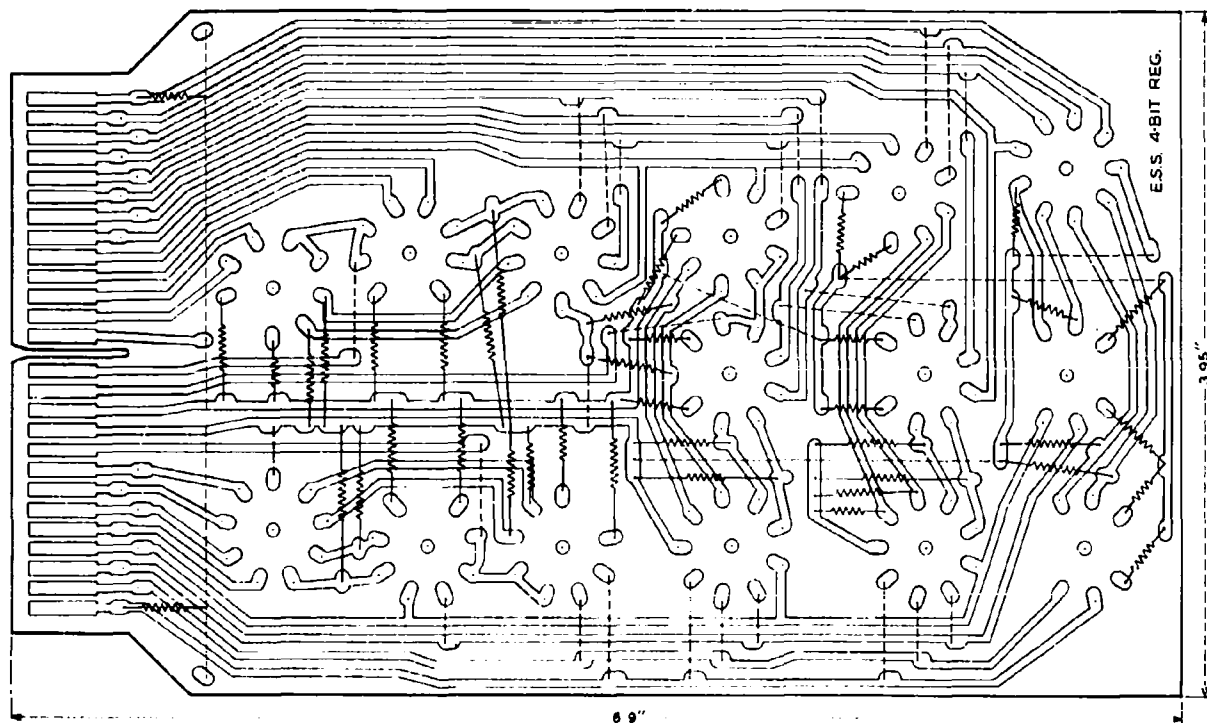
Layout plan of 4-bit register on printed-wire board using T05 header assemblies and external resistors.
